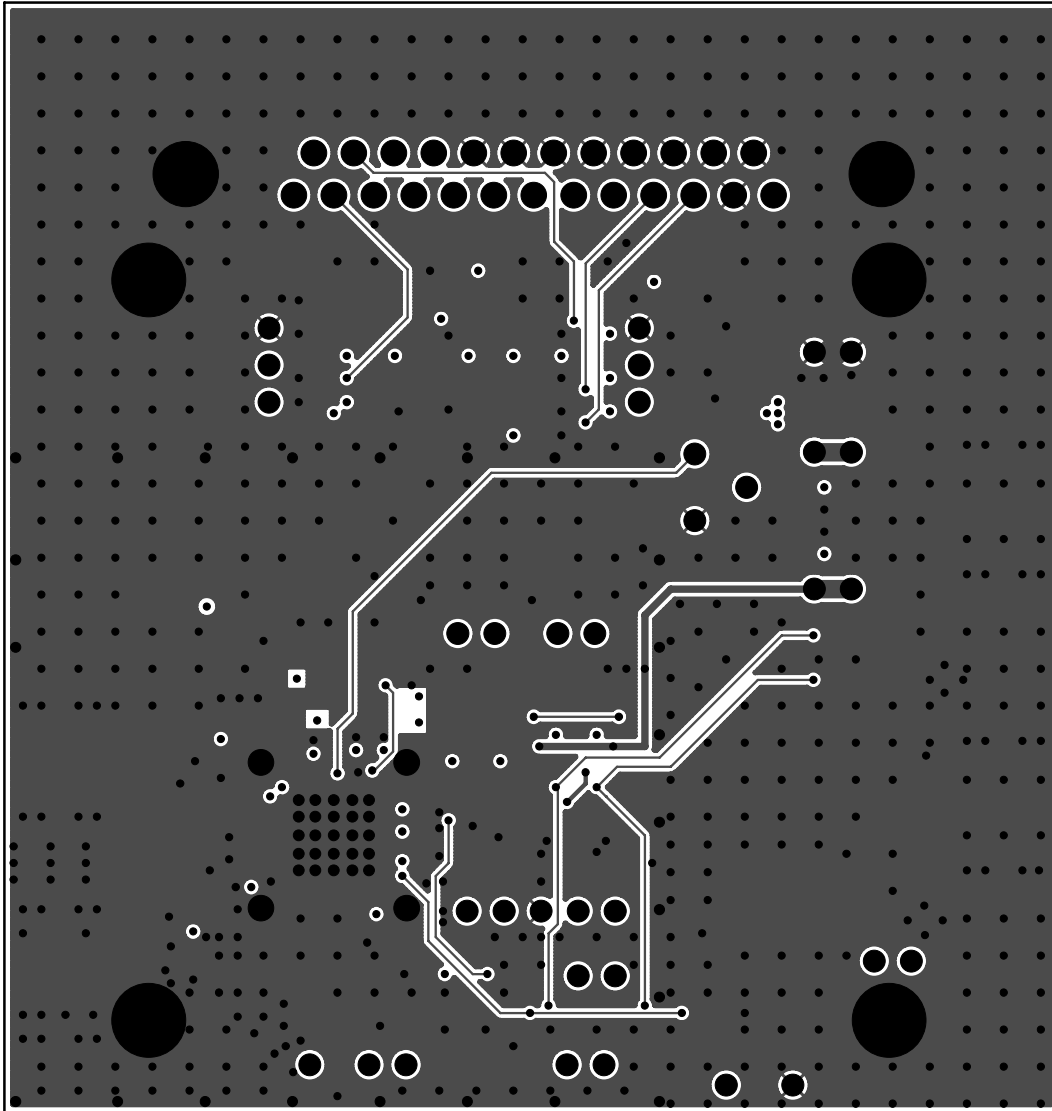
MAX3540 EV Kit PCB Layout—Inner Layer 3
